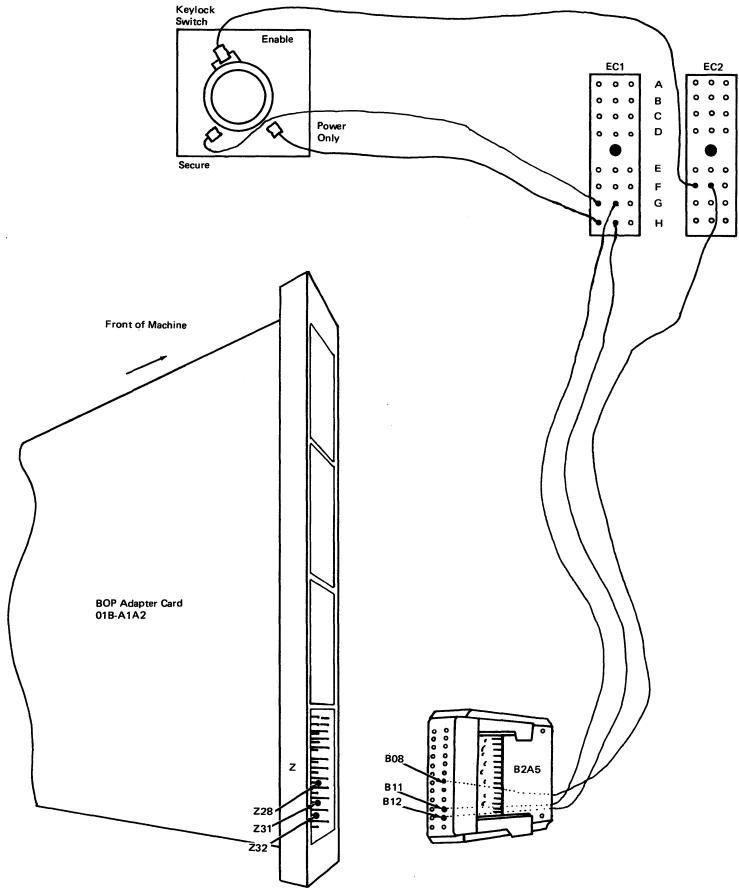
Keylock Switch-to-BOP Adapter Card Wiring
